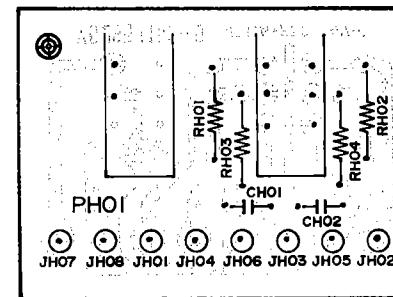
Muting Hi Filter Assembly (PH01) Component Locations
